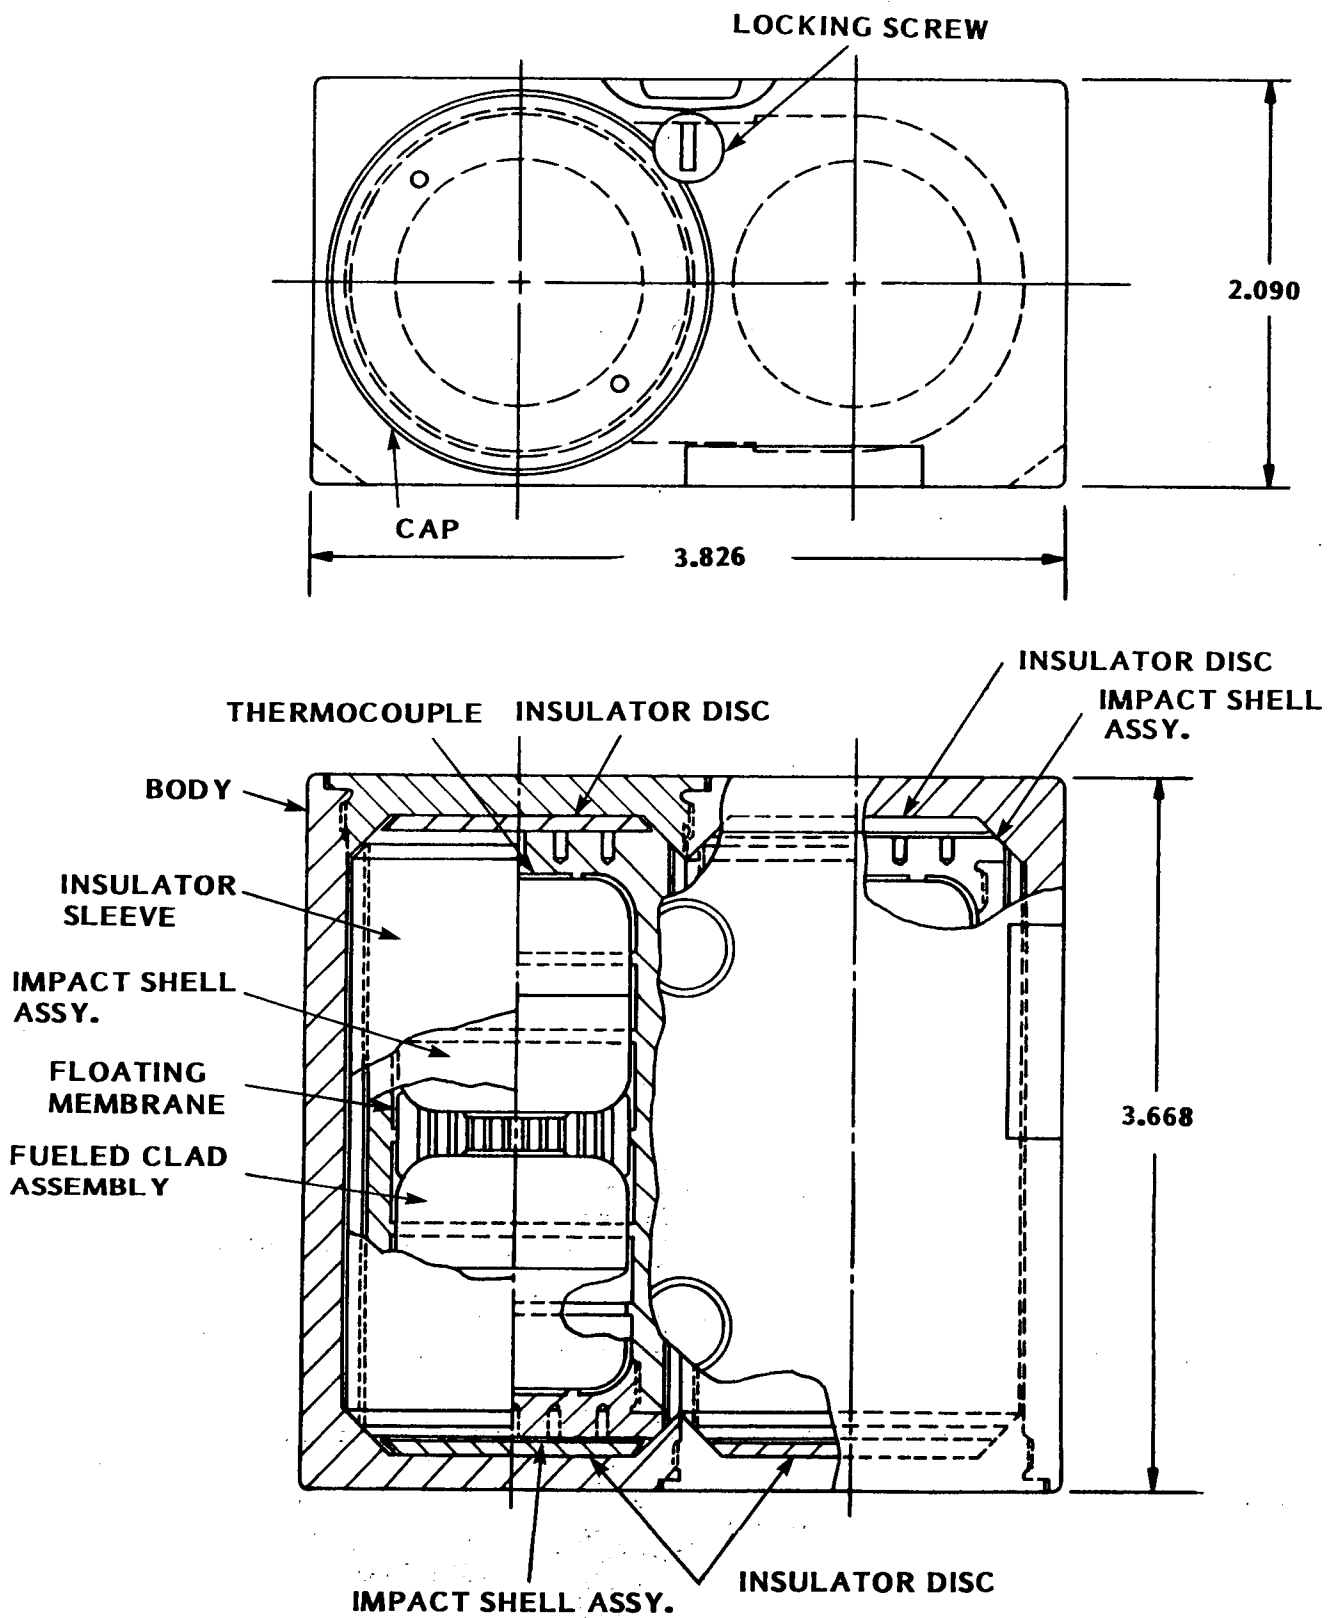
General Purpose Heat Source (GPHS) - Test Module
